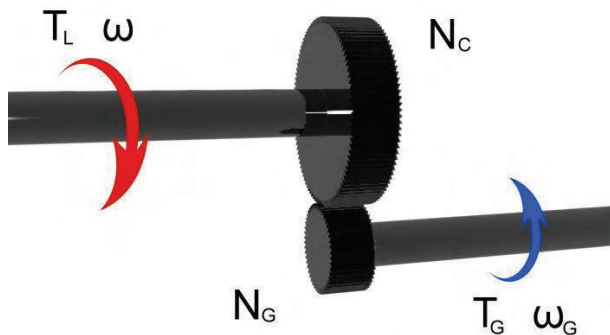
Figure of gear train, Right side is connected to generator and left side is connected to crank shaft.
